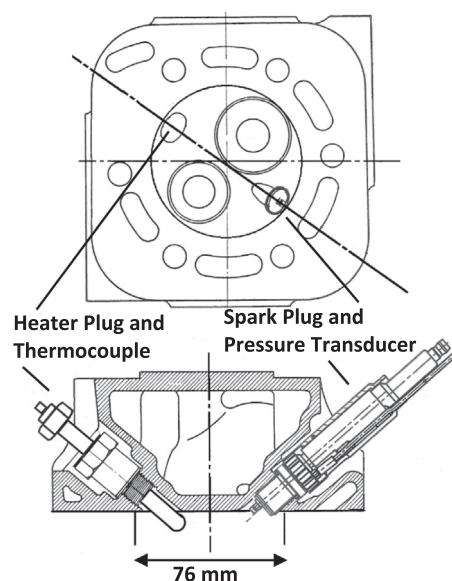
Cross-section and plan view of the cylinder head showing the heater plug and thermocouple, and the spark plug with integral pressure transducer, adapted from Ricardo and Hempson [2].
